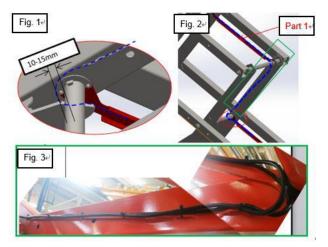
Fifth-layer pipeline assembly 1. Wiring plate assembly
